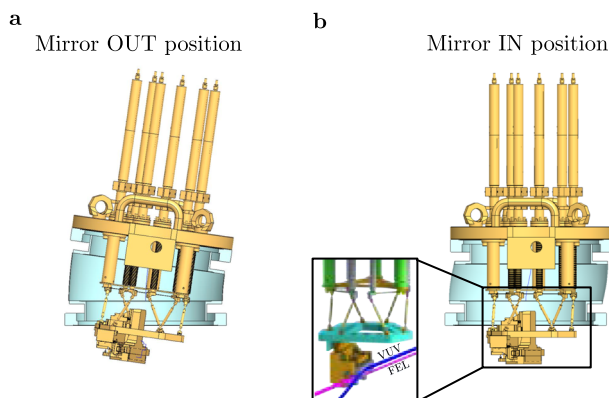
In-coupling chamber design. The chamber connects the VUV setup to the FEL beamline, giving access to the experimental endstation and to the in-line spectrometer. Linear actuators on the top flange control the hexapod kinematics structure, on which the mirror is mounted. A tilt mechanism and a bellows allow for the movement of the mirror out of the beam paths.
